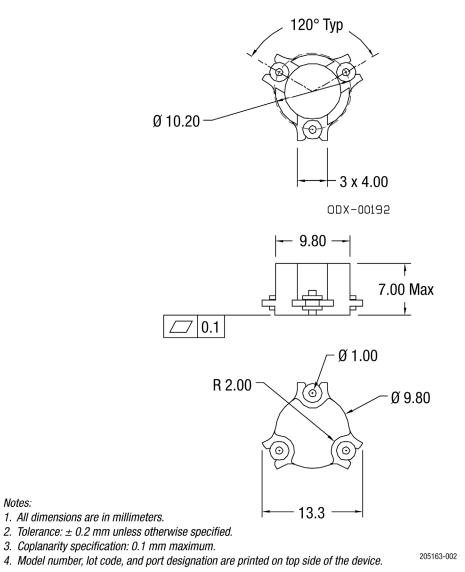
SKYFR-001693 Package Dimensions and PCB Footprint
